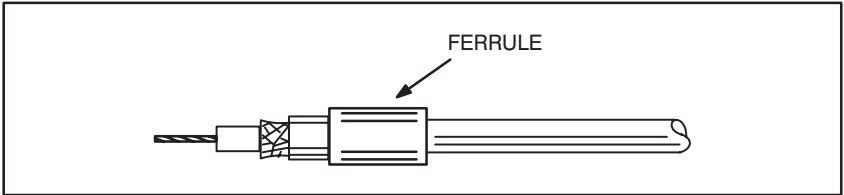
Slide Ferrule onto RG-59/U Cable
